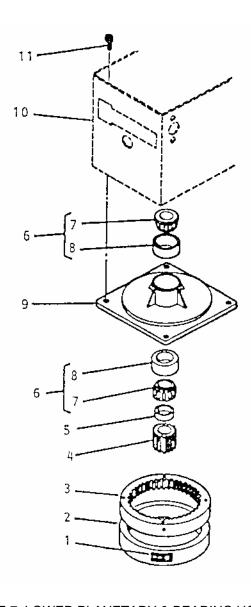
LOWER PLANETARY & BEARING HOUSING ASSEMBLY
